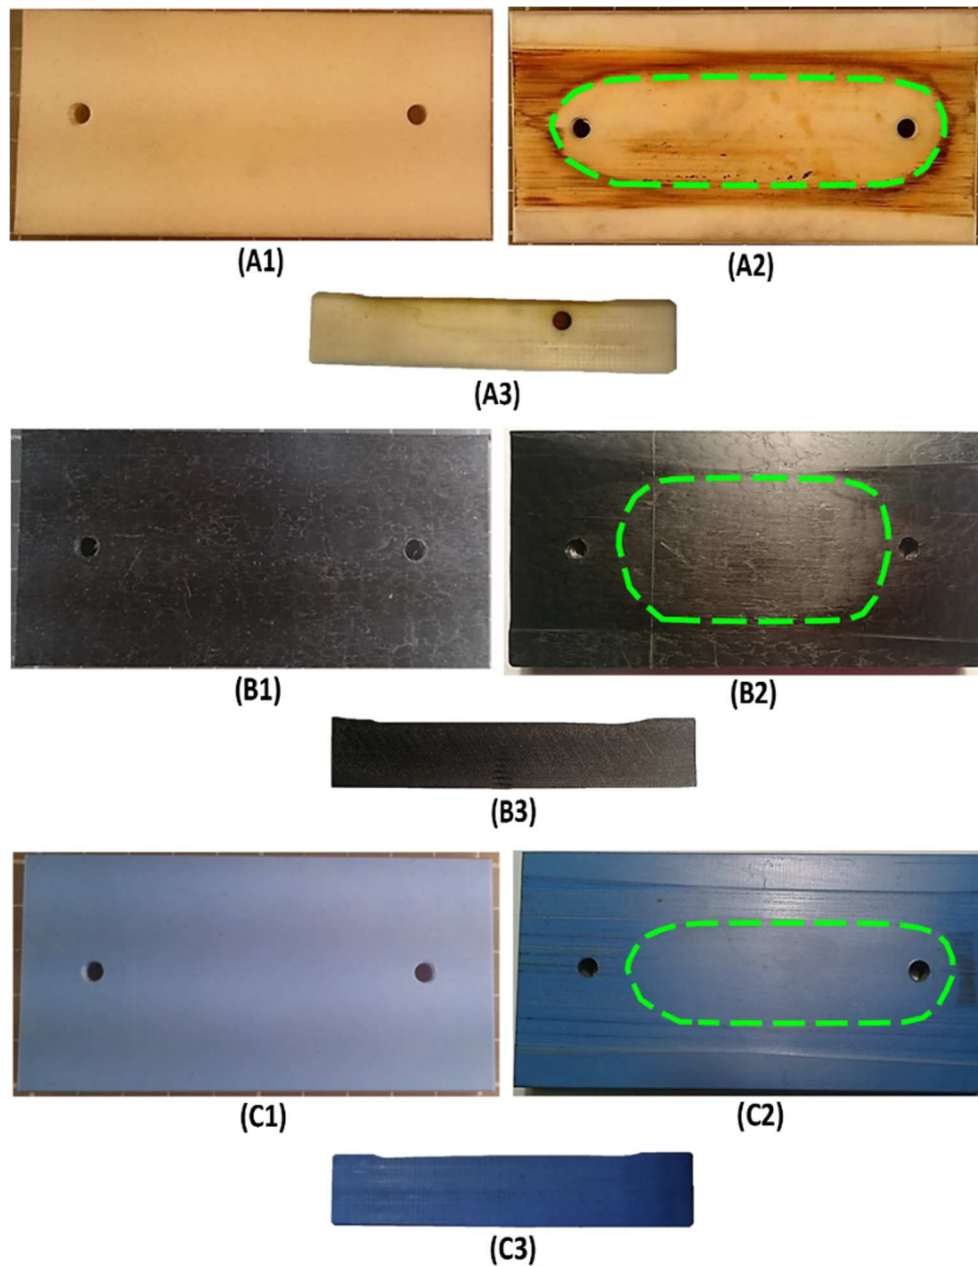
Bearing pad surface wear from initial tests before sprung bearing pads were employed. (A) Type I (B) Type II (C) Type III, (1) New pad; (2) Pad B surface wear; (3) Side view of pad B wear
